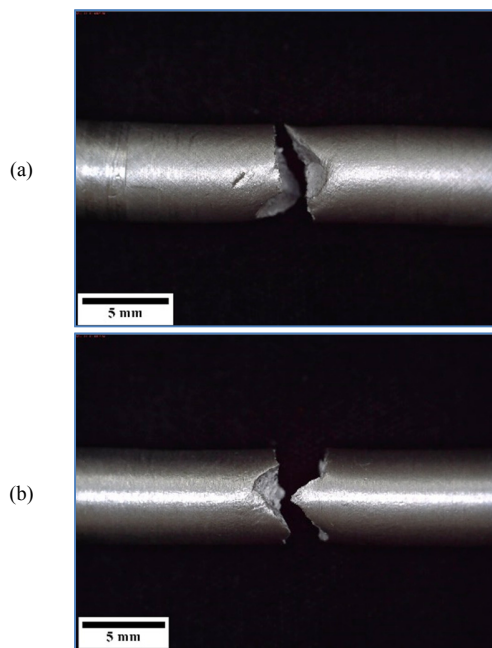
Fracture surfaces for t_f : (a) 7s, (b) 8s
